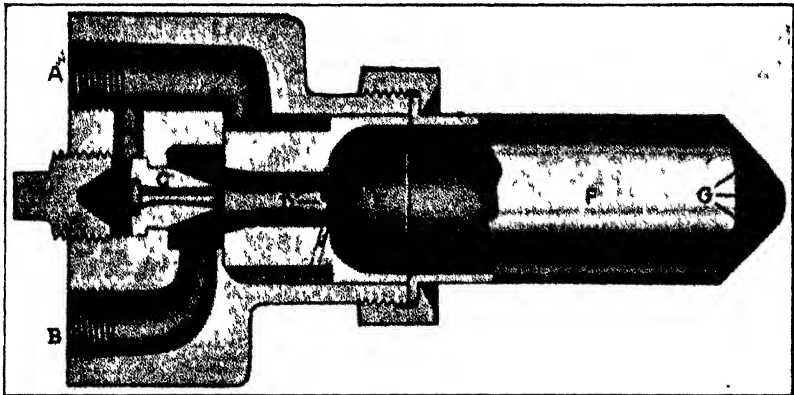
Inside-mixing type of oil burner. (*The Engineer Company.*)
